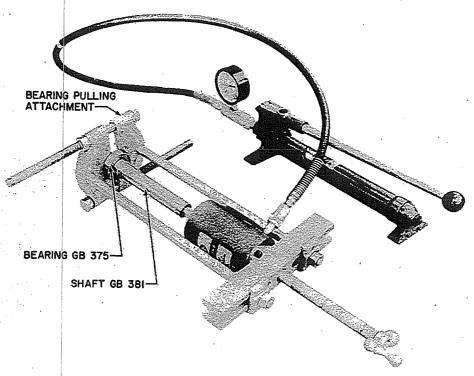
1 to 1 Shaft, Installation of Bearing GB375
